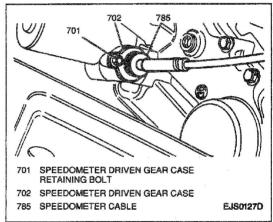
Speedometer Cable at Speedometer Driven Gear Case
